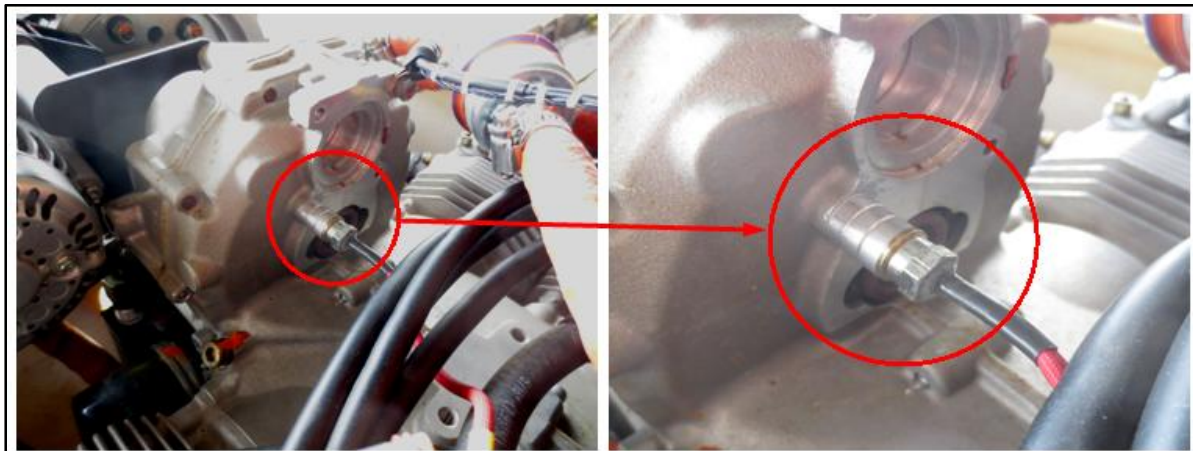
TTP2639- Locate in baffle pad/ear on carbureted and injected (iS) engines. Clear
